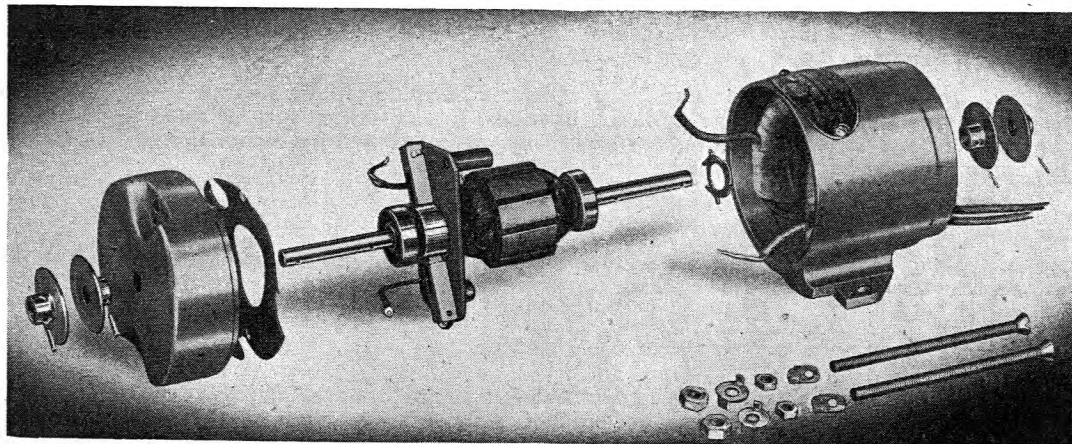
Exploded view of driving motor (compare with Fig. 42 in Chap. 9)
